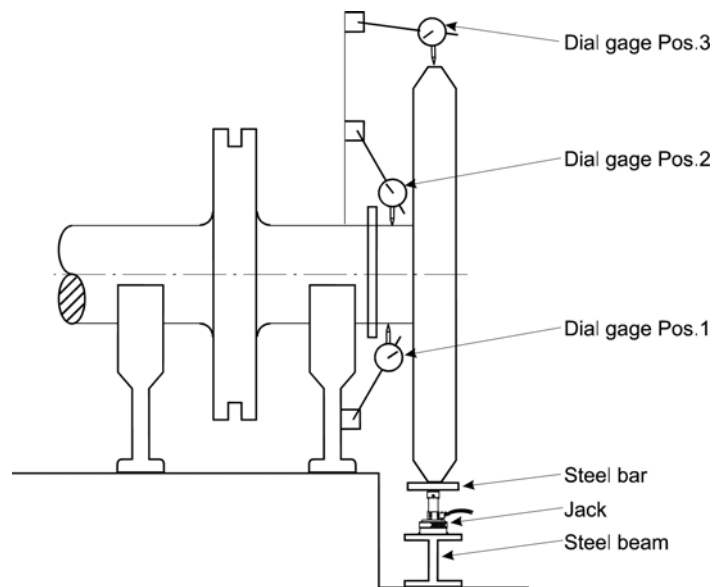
Dial gauge position for aftmost main bearing jack-up measurement
